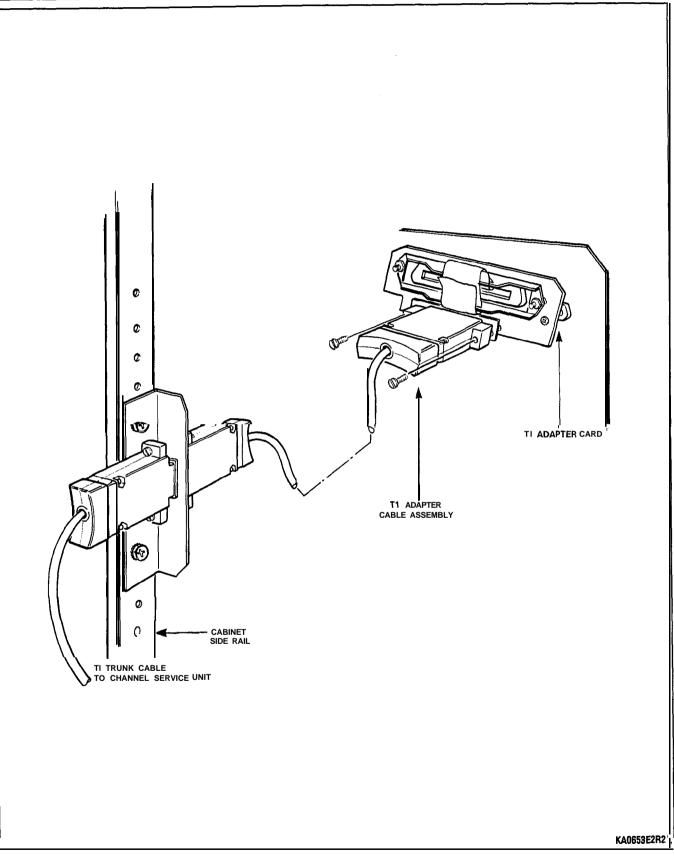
Installation of a T1 Adapter Cable Assembly
